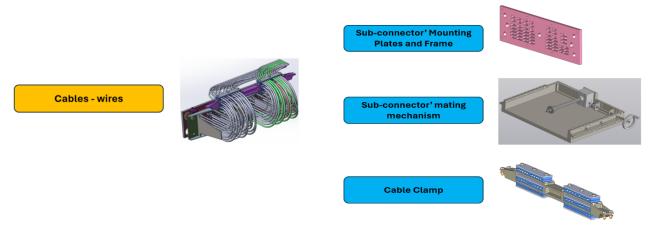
Components of connector mechanical assembly interacting with the connector harnesses (the components are out of this Contract Scope)
